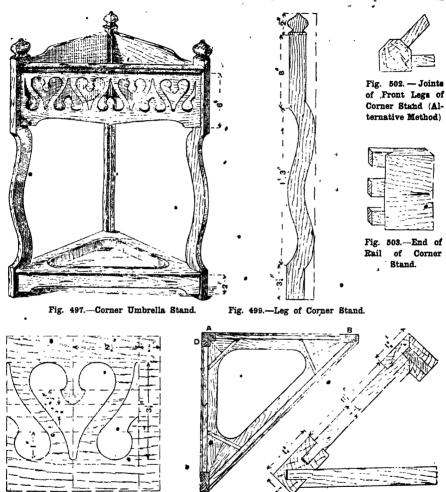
Fret Design for Corner Fig. Stand Rail.
